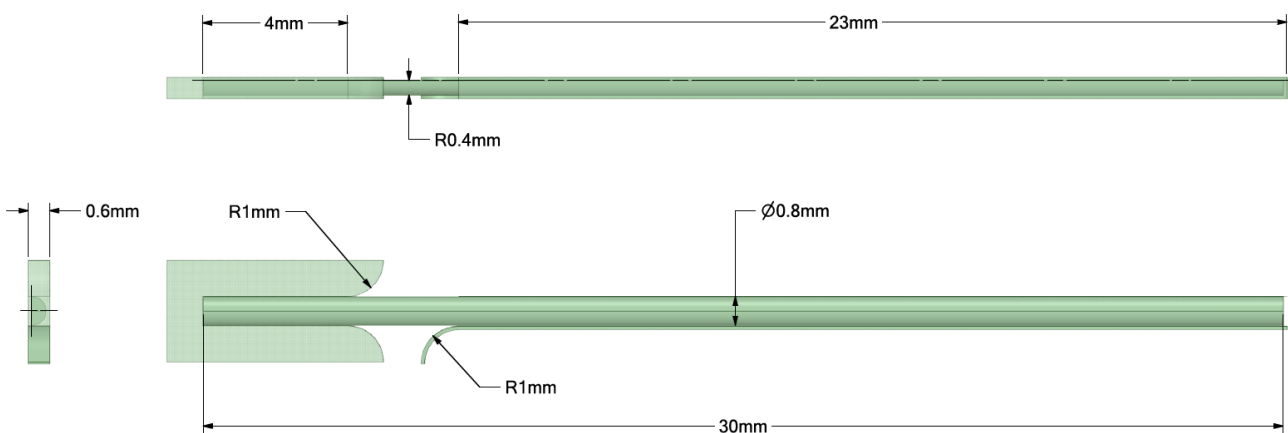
Dimensions of the quarter model used for forming the hooked-ends
